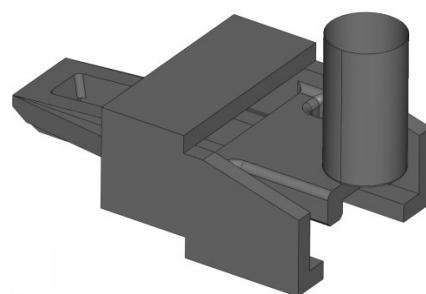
The shape of examined samples with cylindrical element providing displacement
